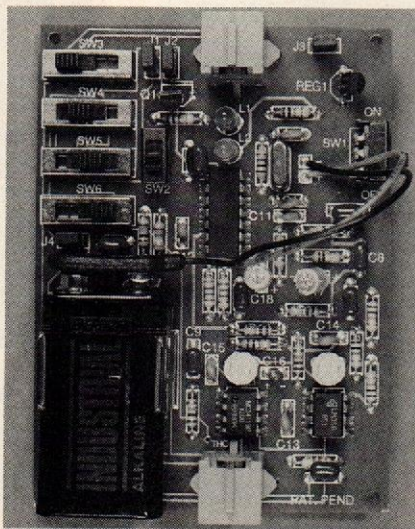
PHOTOGRAPH OF LOADED BOARD for the TVS250.
